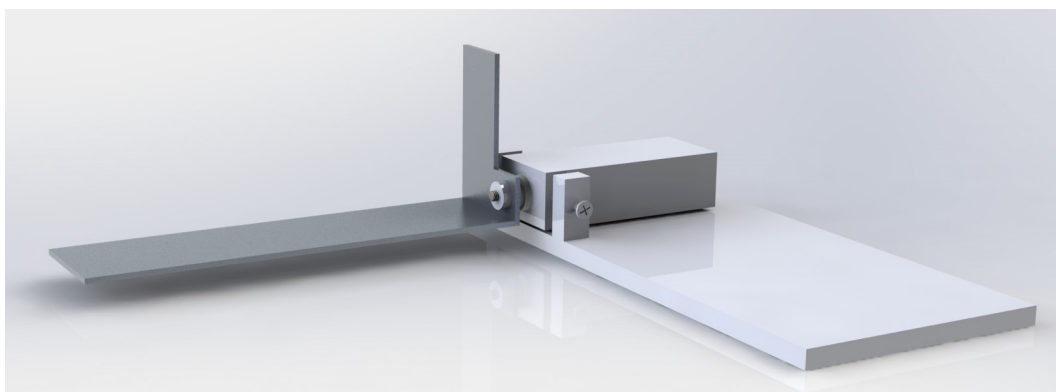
Base version 2 showing that the cylinder is fixed inside a block, but is able to rotate because of the hinge joint.
